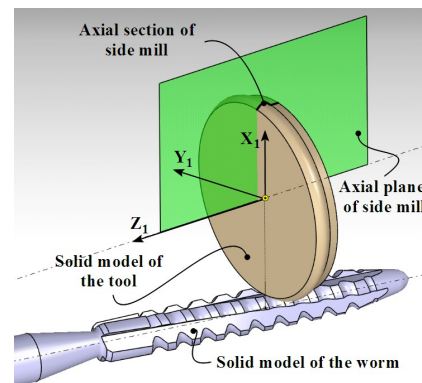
Axial section of the side mill / Secțiunea axială a sculei disc.
